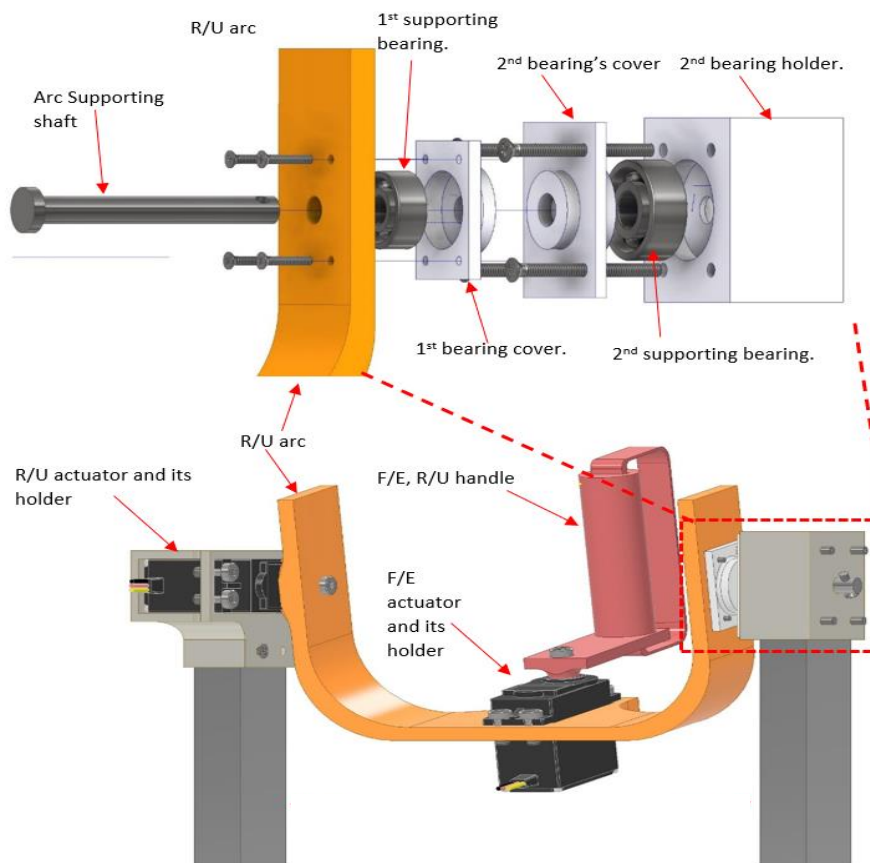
3D CAD assembly model of the wrist F/E and R/U mechanism:
